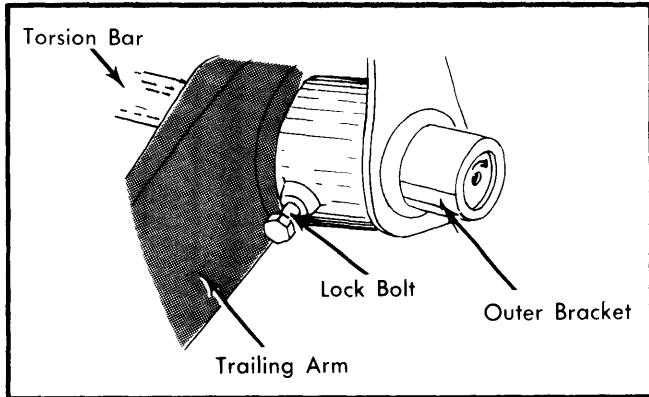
Installed View of Torsion Bar Outer End Attachment
